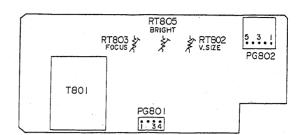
Electronic Viewfinder Circuit Board (Components Side)
